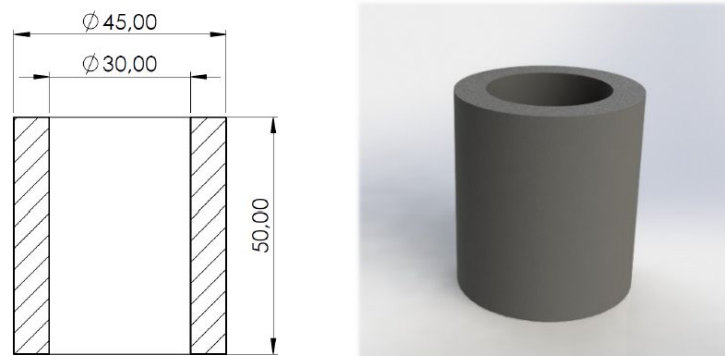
Design dimensions (in mm) of the test pieces to be manufactured.
